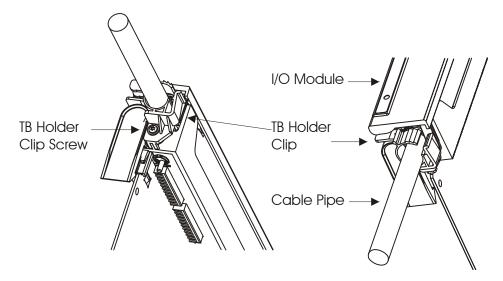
I/O Module with Terminal Block (TB) Holder Clip
